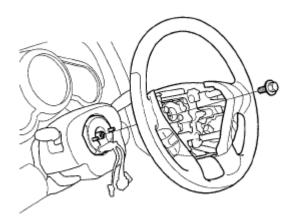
Identifying Steering Wheel Bolt Courtesy of AMERICAN HONDA MOTOR CO., INC.
